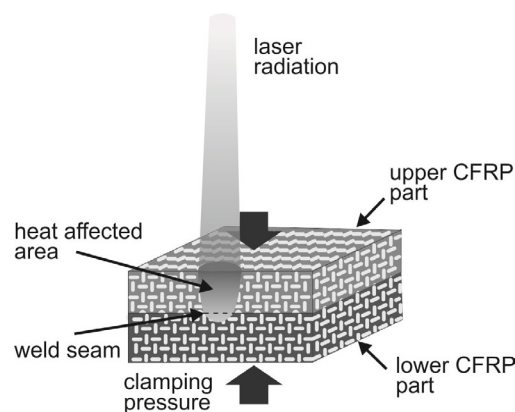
Principle of heat conduction welding of CFRP.
